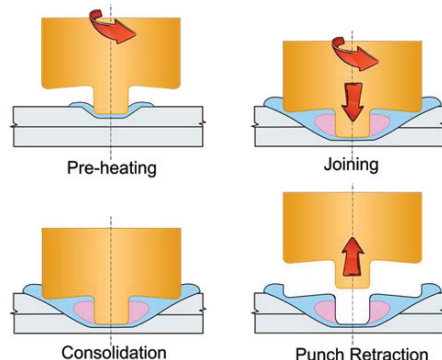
Typical phases of friction stir spot welding process: pre-heating, joining, consolidation and tool retraction.
